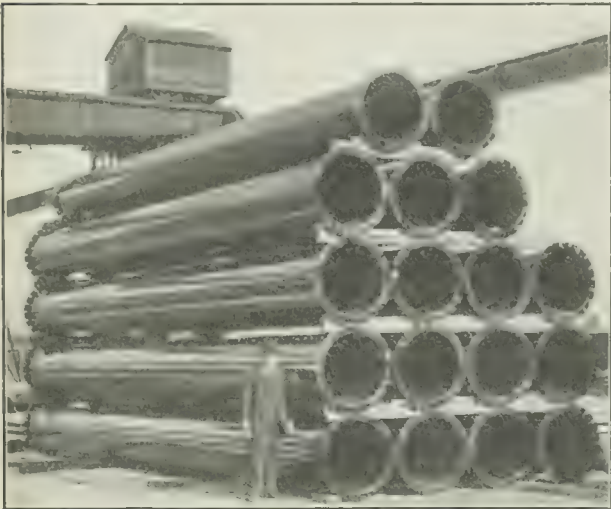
Some 30-In. Lap Welded Dredging Pipe, 32 Ft. Long. Made by the American Spiral Pipe Works, Chicago, Ill.
